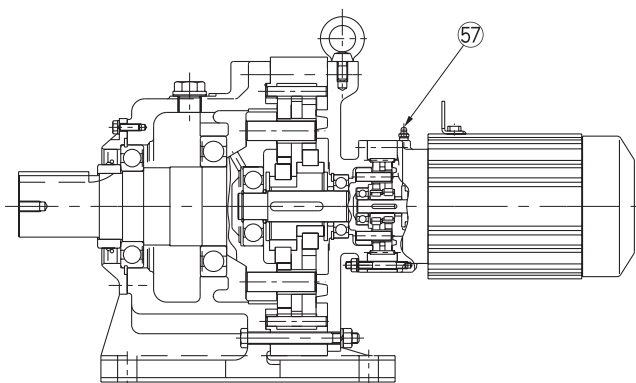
Type CHHM (Horizontal, Gearmotor)
